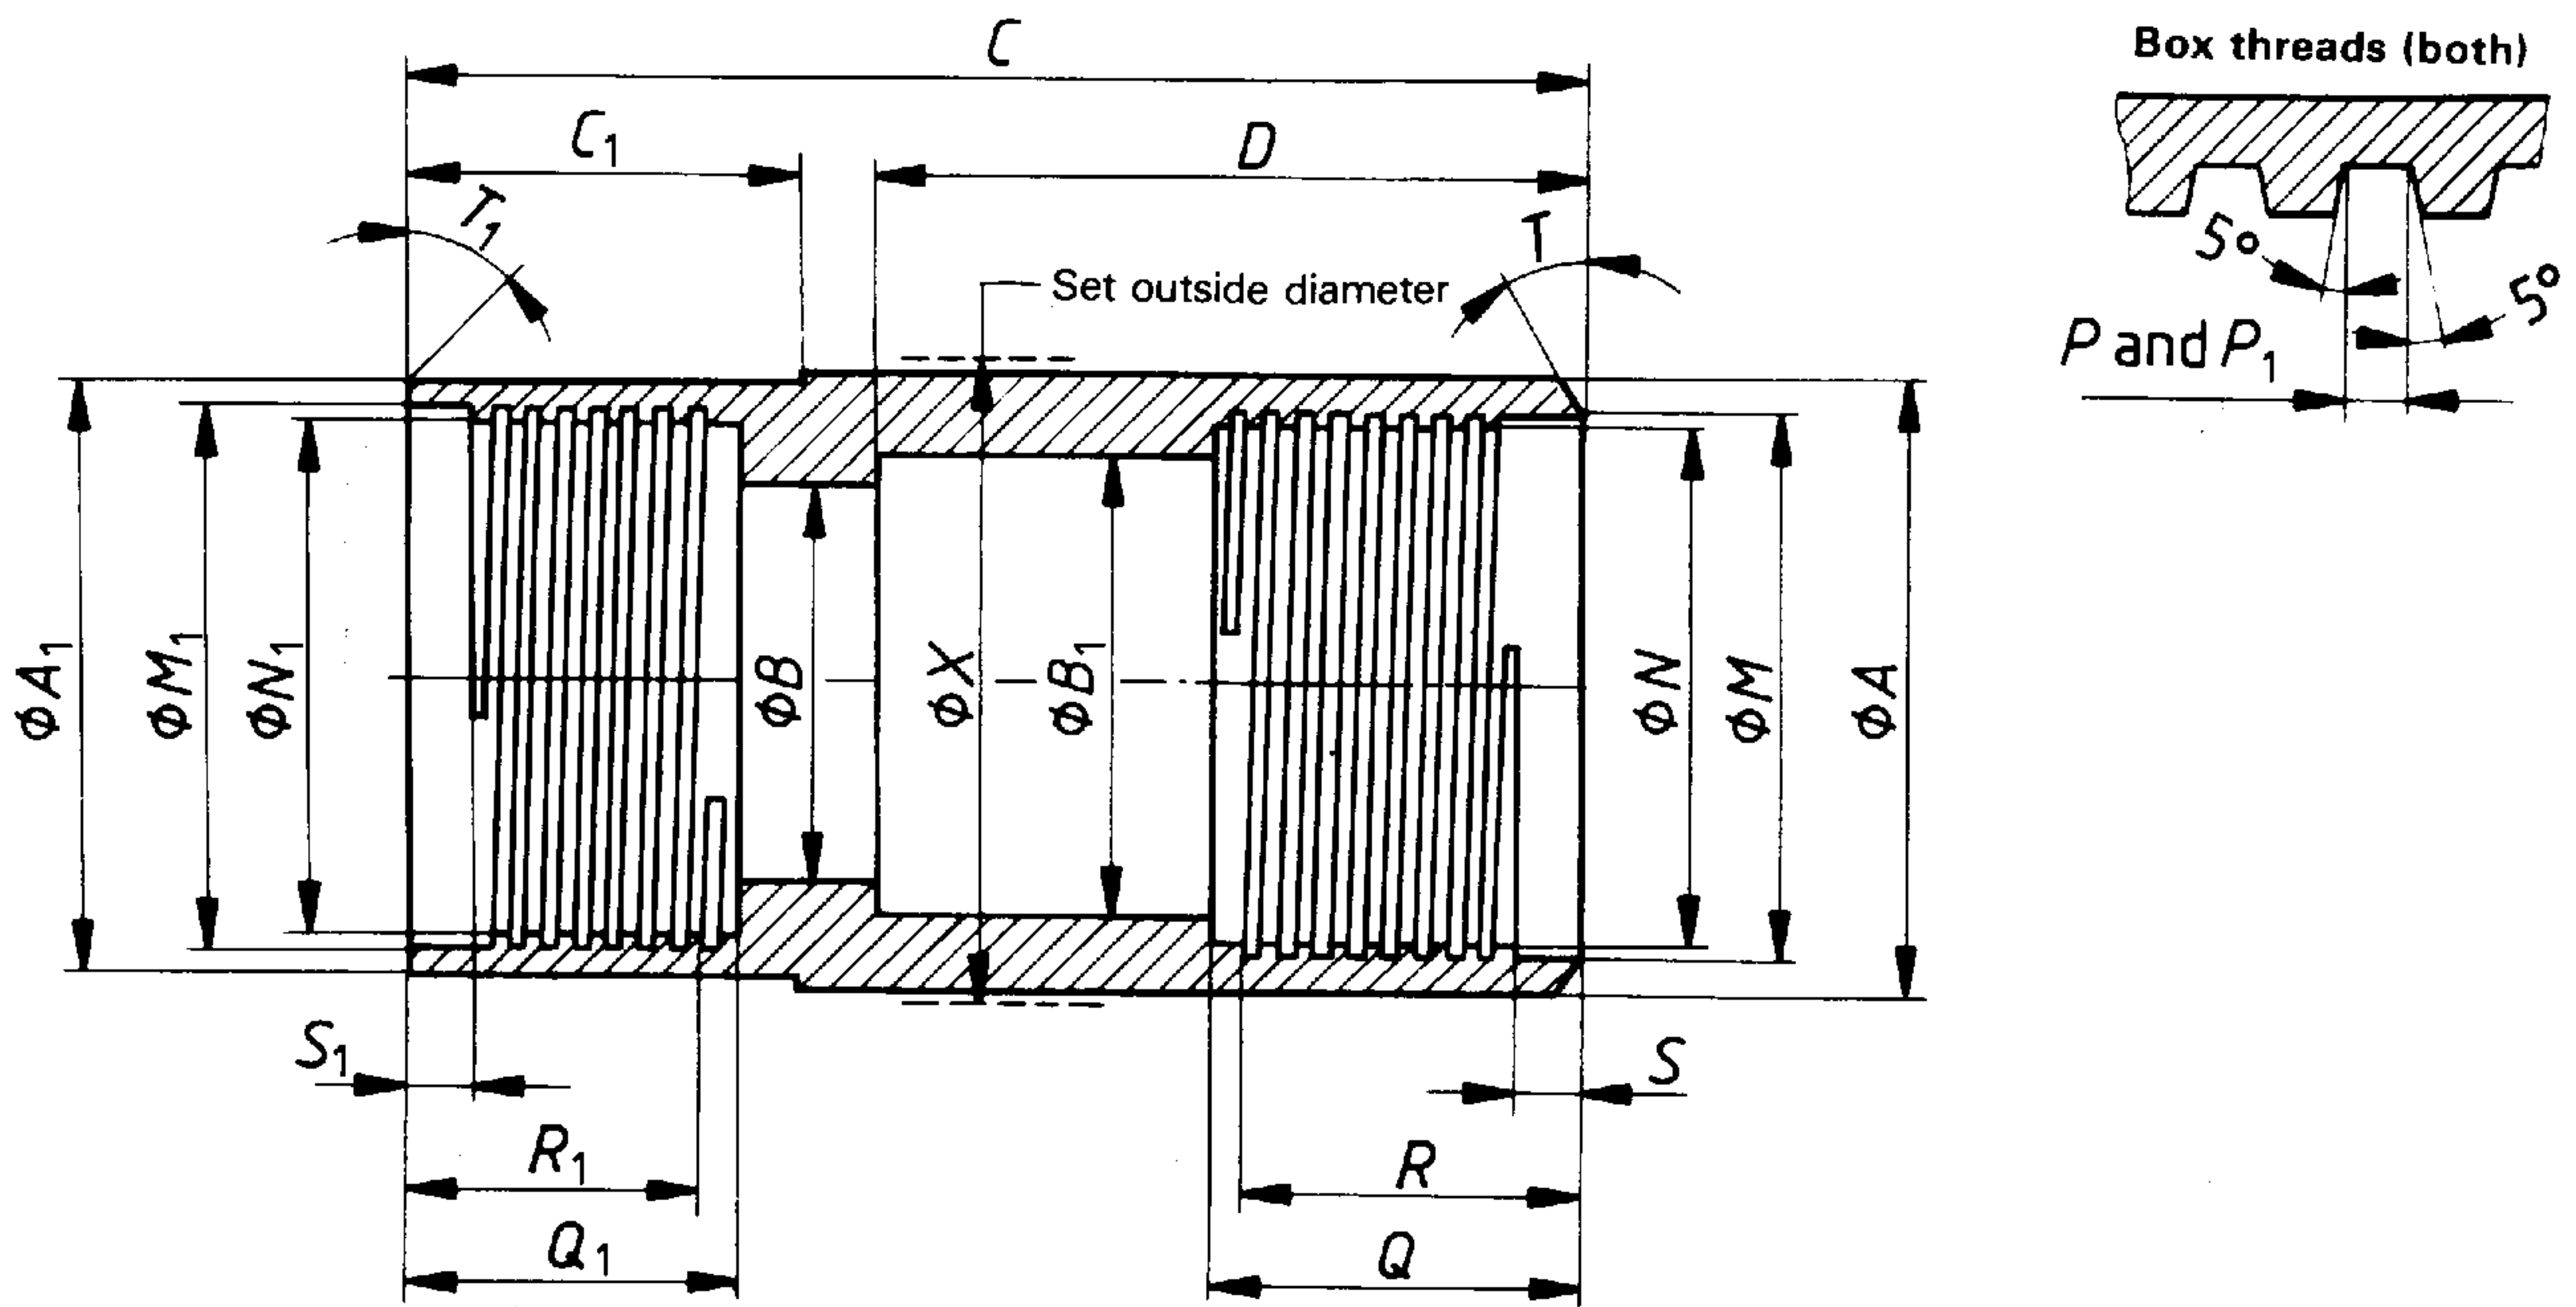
"WG" design double-tube core barrel — Reaming shell (see table 32)
